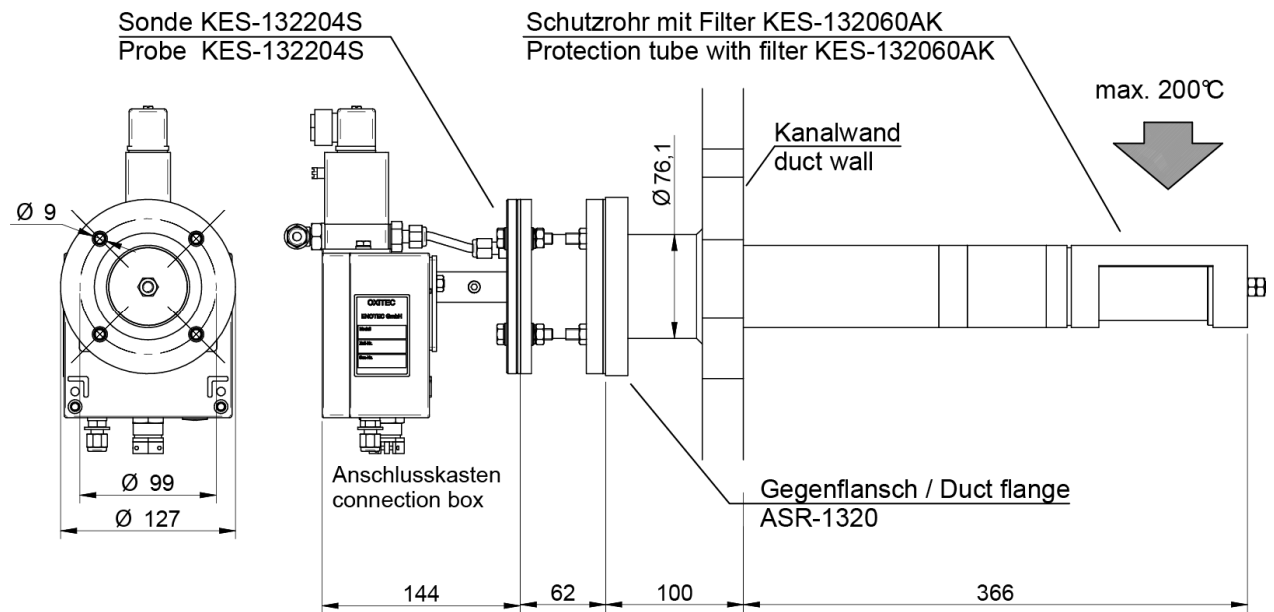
Dimensions in mm of the KES-132X probes with KES-1320600AK (active carbon filter)
